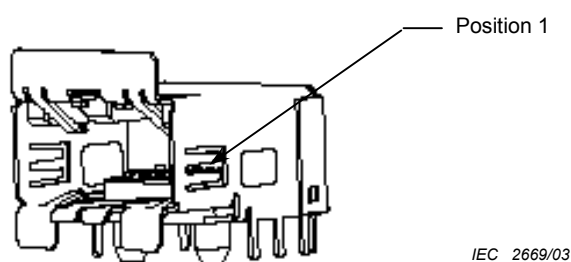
Isometric view fixed board connector (XB) right angle (version 2)
